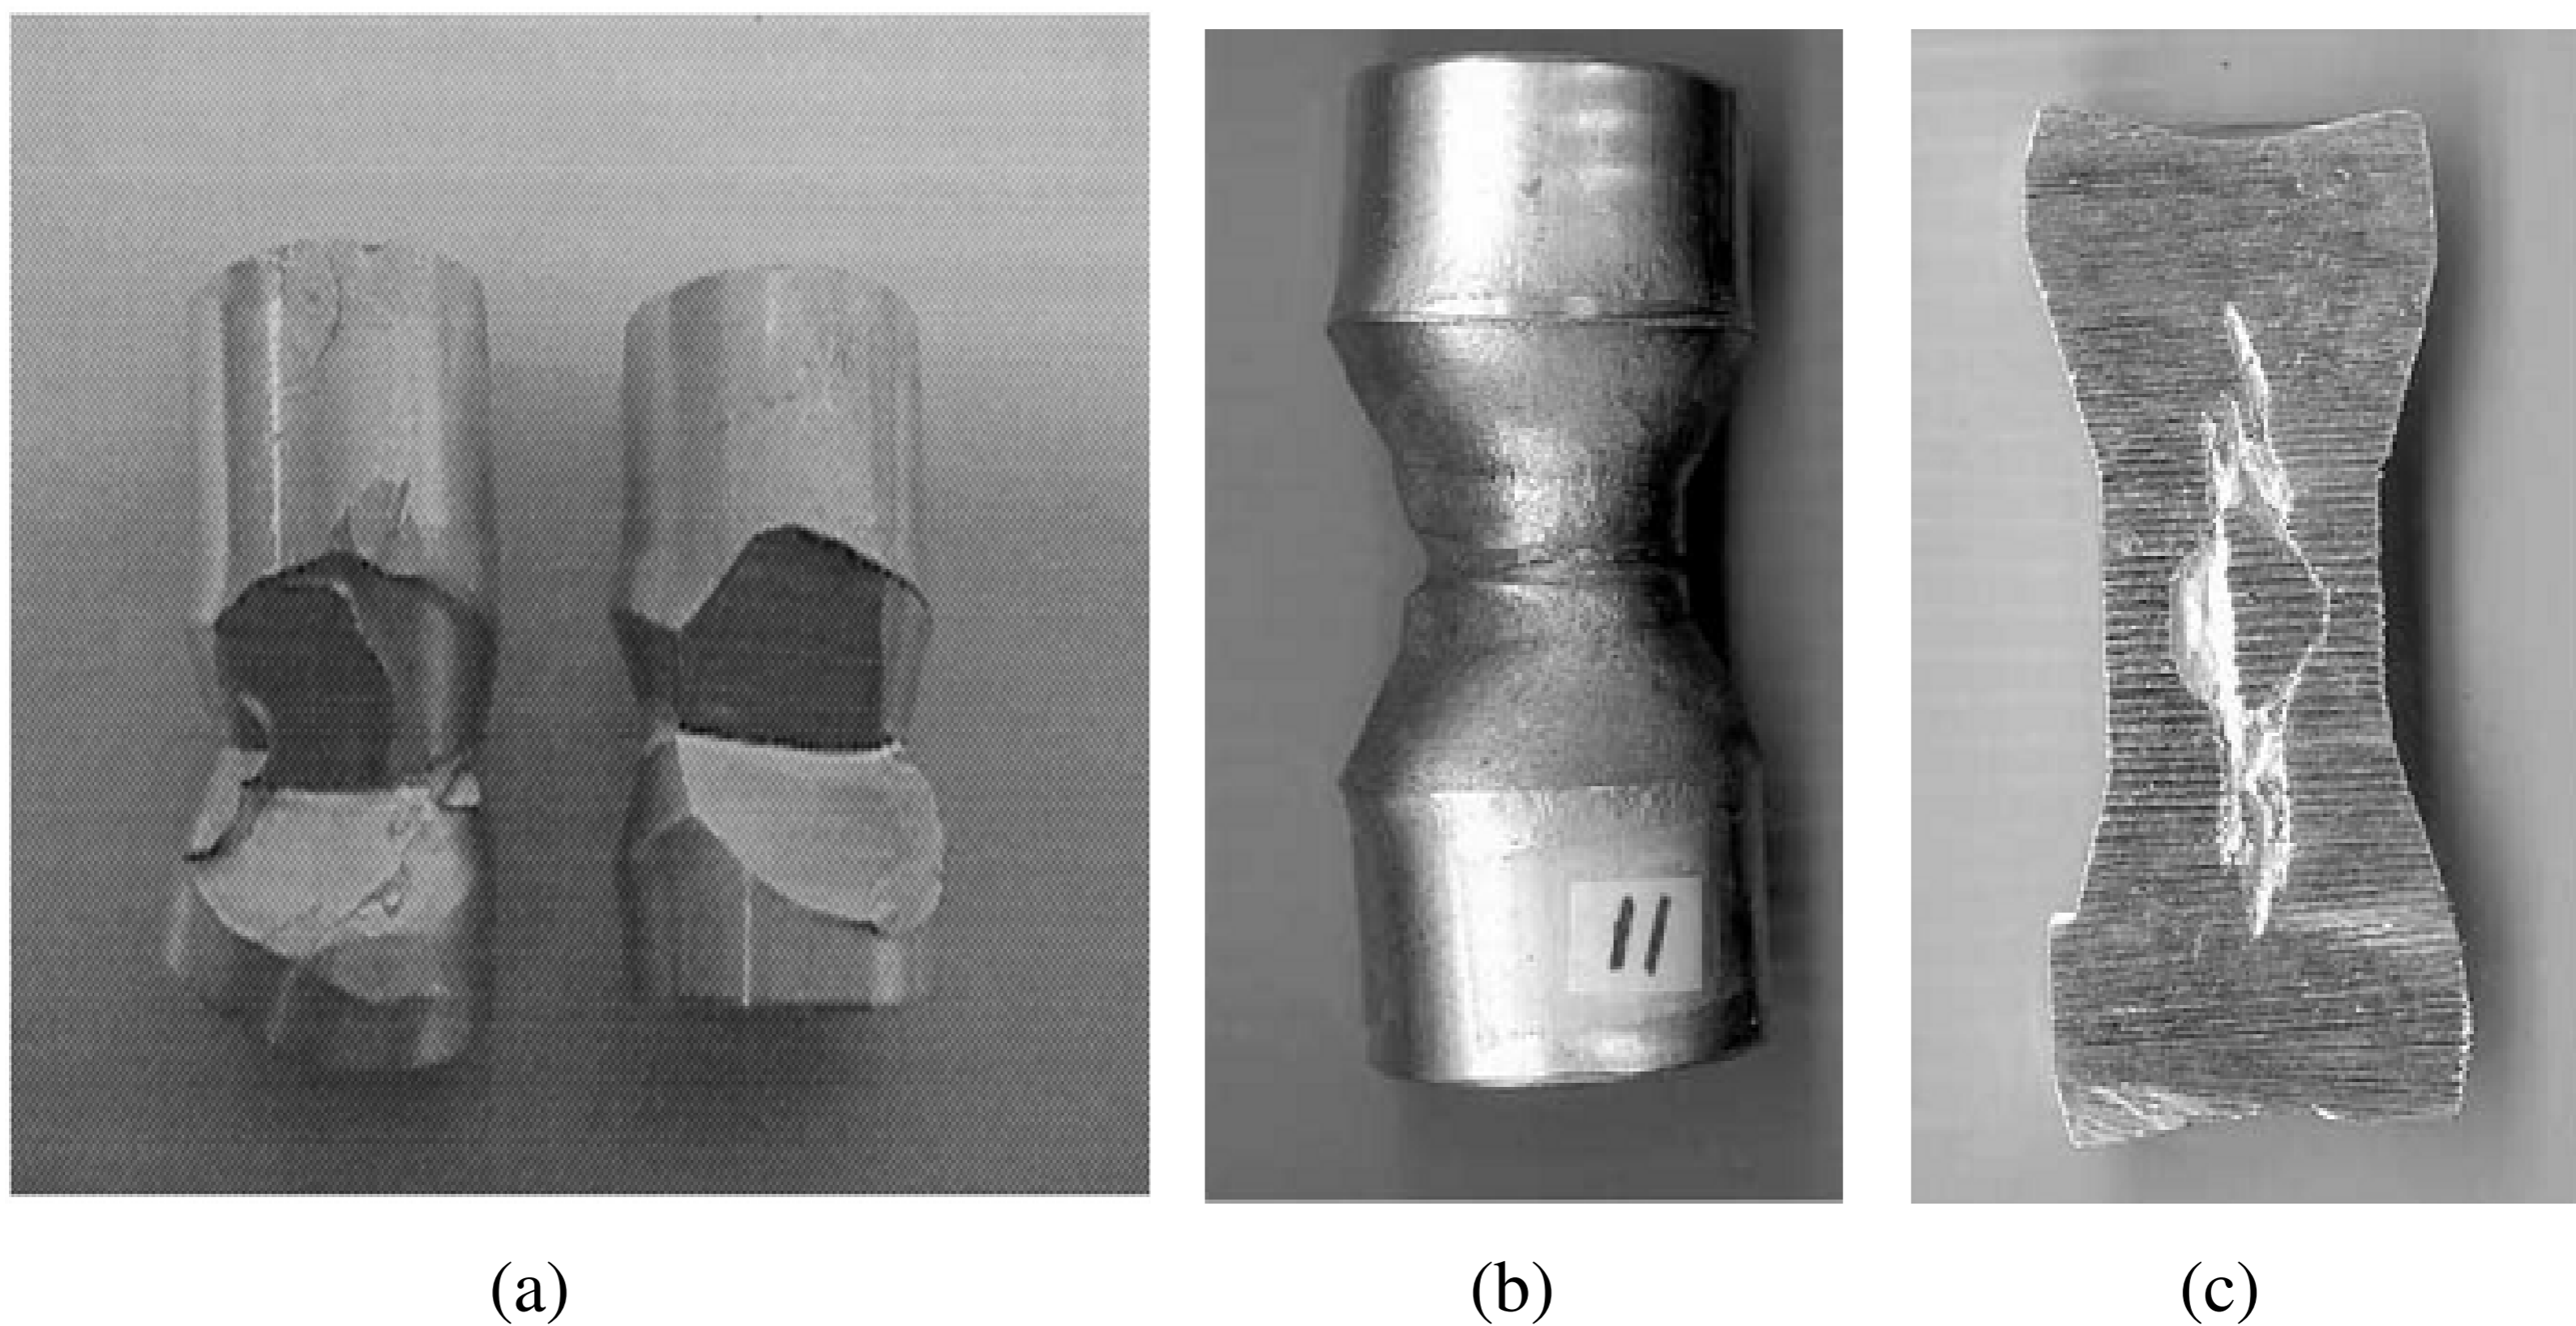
Typical defects in CWR process: (a) failed CRW work-piece due to excessive tool work-piece slip, (b) necking of the work-piece and (c) internal void formation in work-piece (Source: Journal of material processing Technology 1998-2002)
